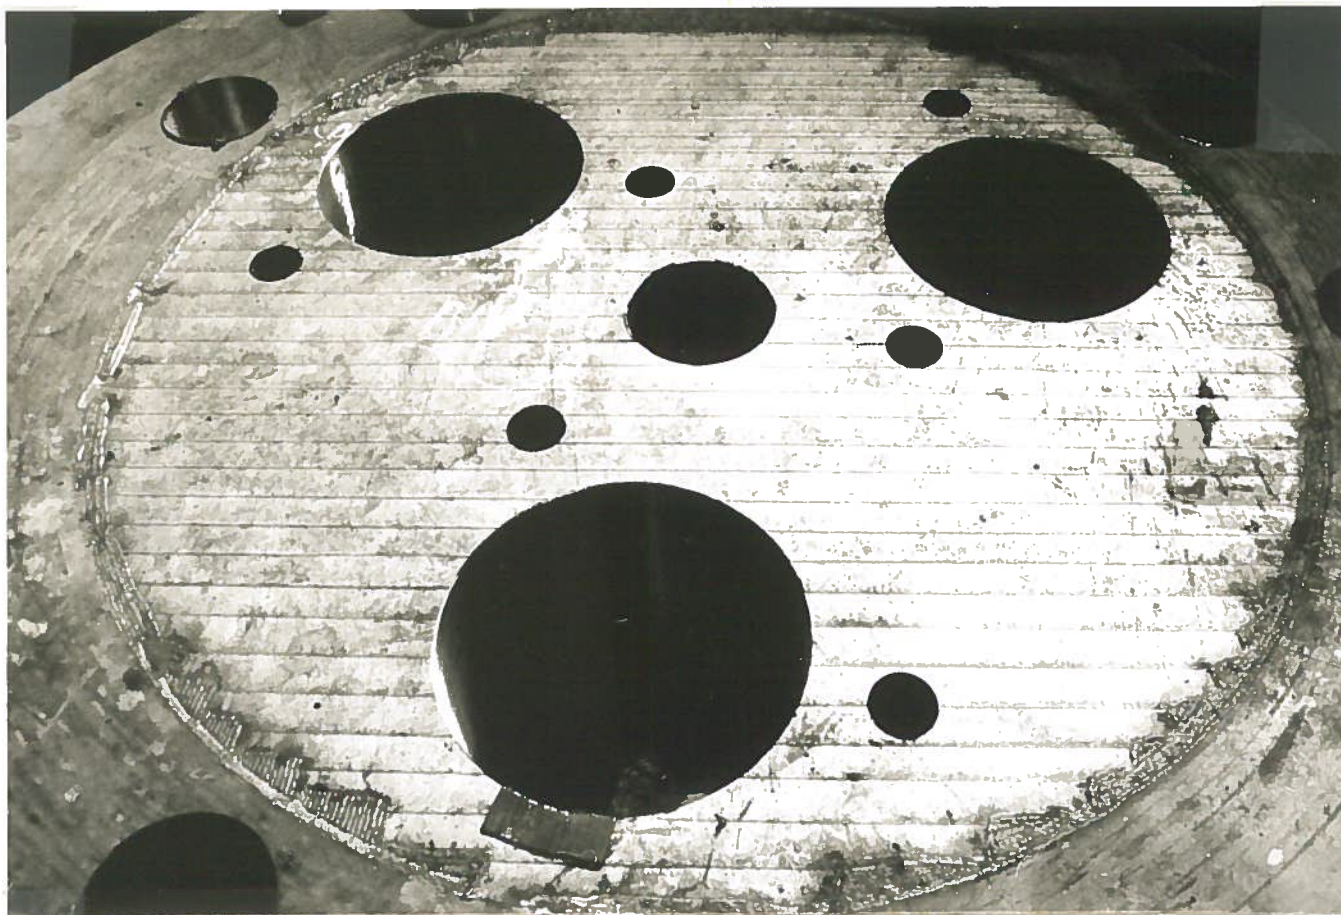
Close view of the pole cap after deposition of the stainless steel layer.
